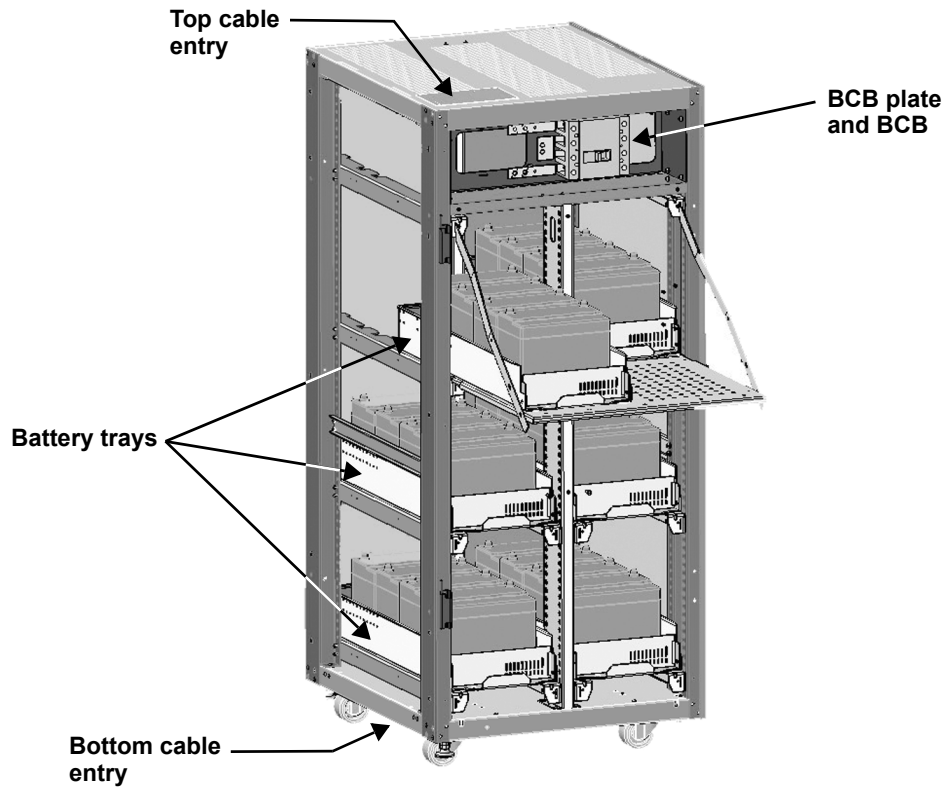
Wide battery cabinet, 57 in. (1488mm) - front view
